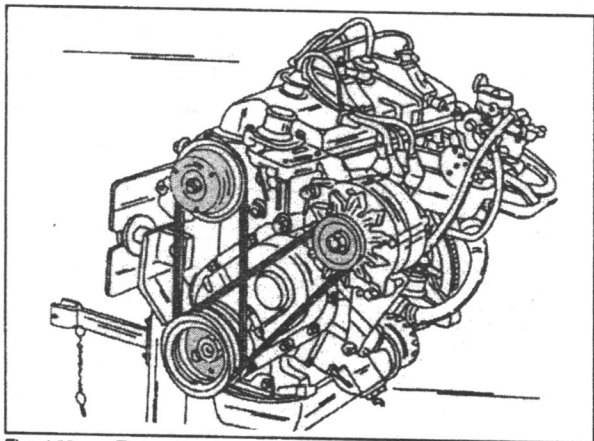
The water pump drive belt is fitted vertically between the crankshaft pulley and the water pump. The other belt drives the alternator.
